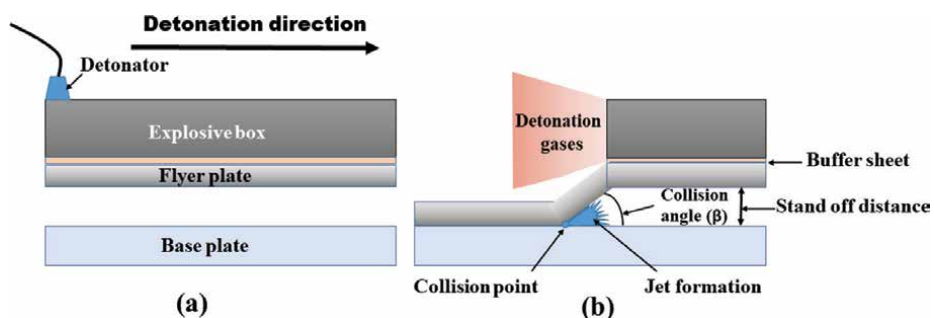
Schematic diagram of explosive welding process in parallel set-up, a) initial set-up, b) after the explosion has initiated.
